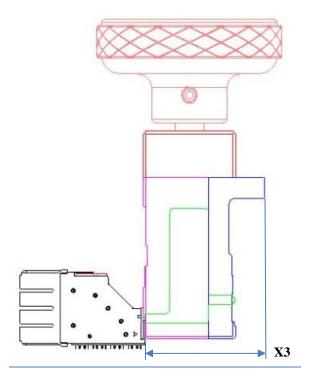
X dimension for stiffener removal tool from the surface of the PCB [X3]
